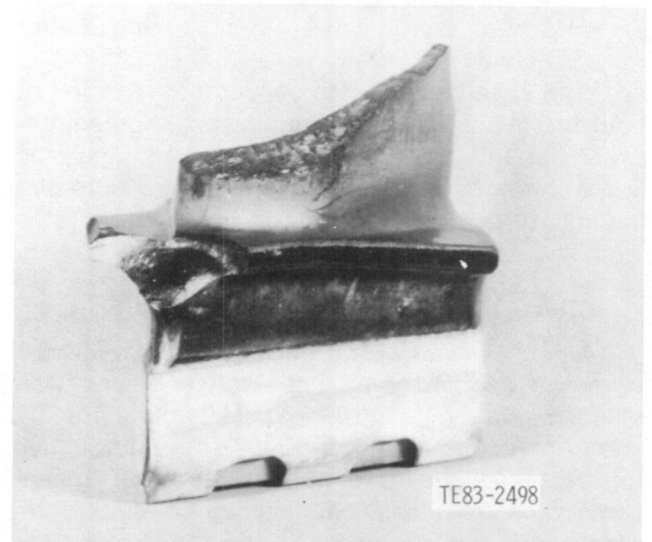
Failed spin test blade, OVSR segment FOD test (side view).
